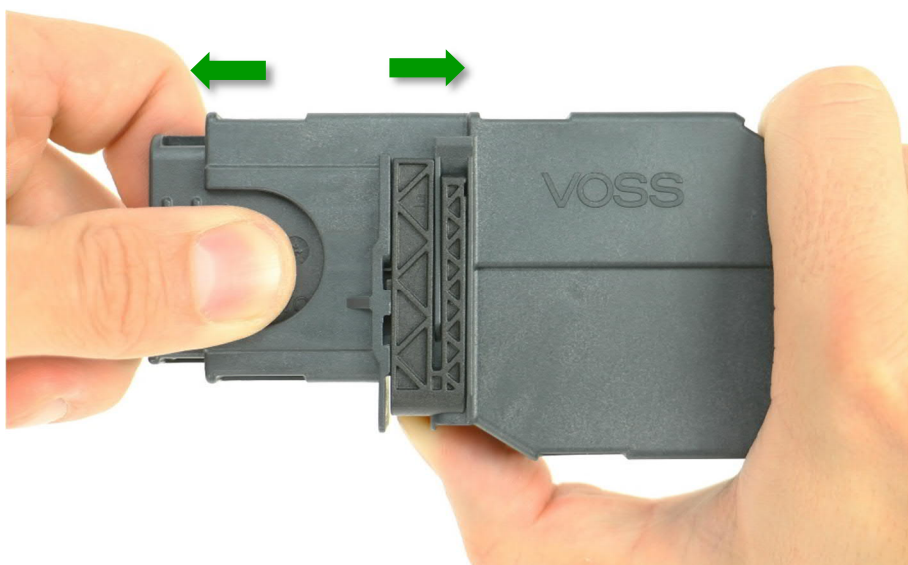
Pulling apart plug and coupling side of manifold 301 *EFSM
